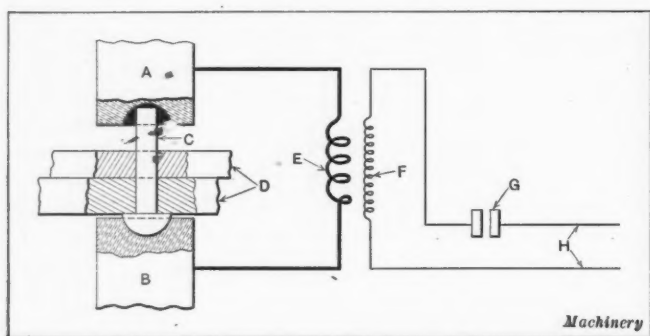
Diagram illustrating Application of Electric Spot-welding Machine for Electric Riveting, showing Electrical Connections
